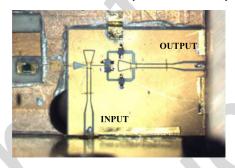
General view of the phase switch assembly inside the module. Alumina dimensions:  $5.93~\text{mm} \times 4.58~\text{mm}$ .
